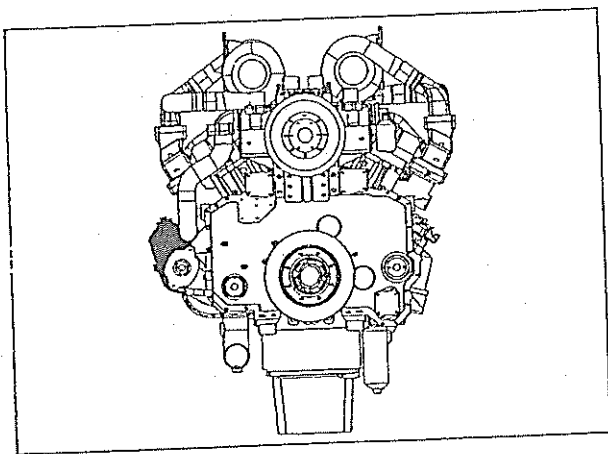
Eliminator (shown shaded) installed on a Cummins QSKV60 Engine - Front View.
